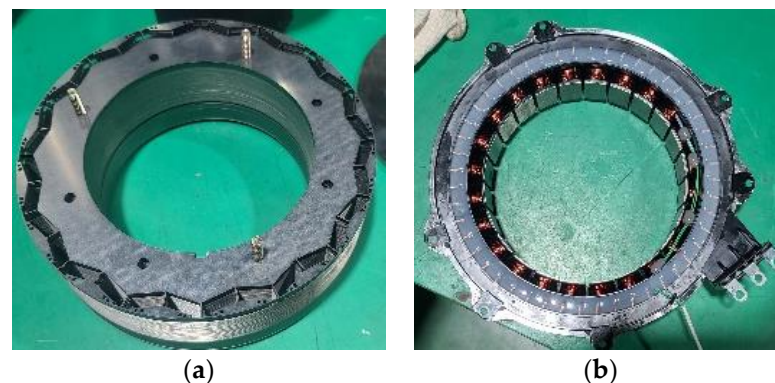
A rotor design process to reduce irreversible demagnetization and cogging torque: (a) rotor of conventional motor; (b) stator of conventional motor.
